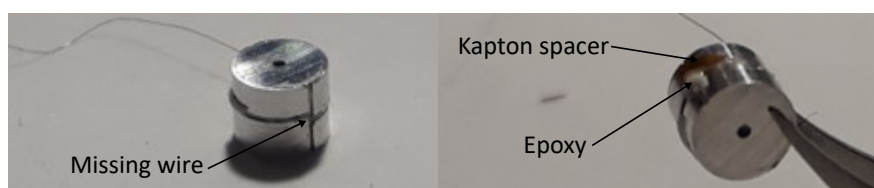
Photographs of the assembled 3 mm cell prototype. Obvious imperfections are visible as a result of errors during the assembly.
